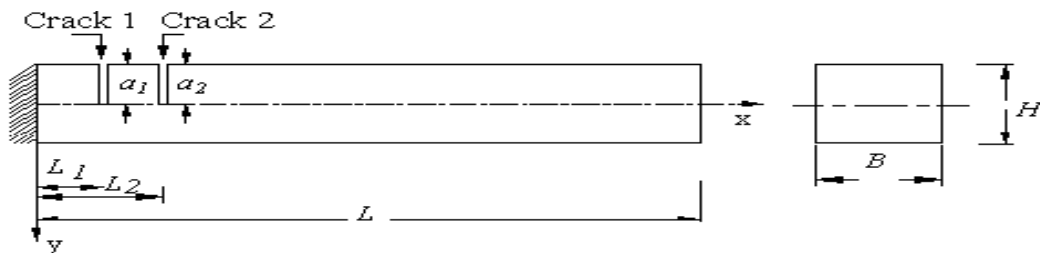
Design of a cantilever beam with two open rectangular shape cracks. First crack details:  $L_1/L=0.1$ ;  $a_1/H=0.5$ ; Second crack details:  $L_2/L=0.2$ ;  $a_2/H=0.5$ .
